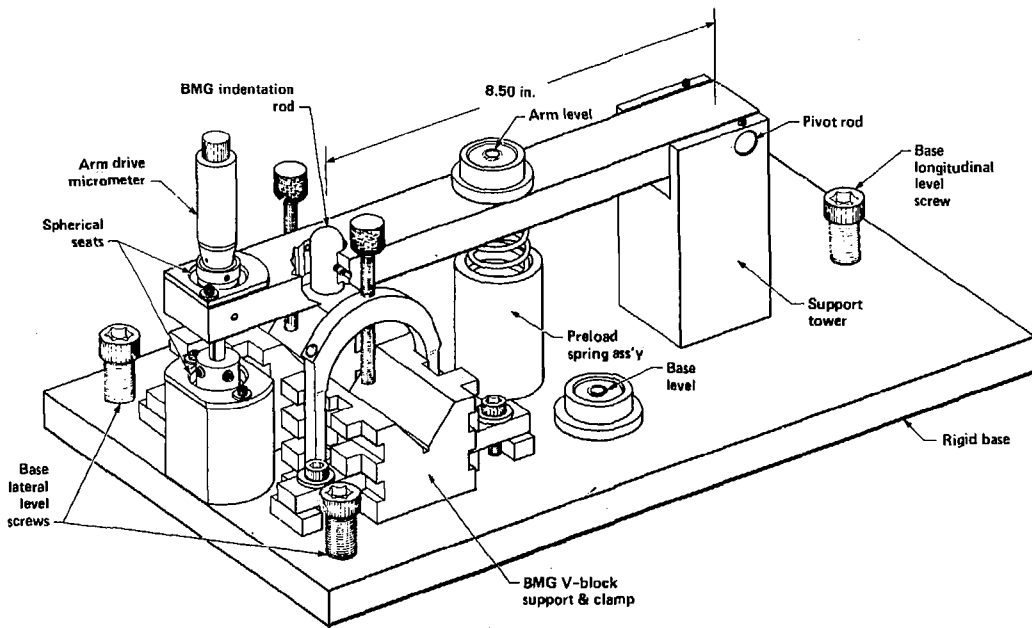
Projection drawing of the micro-indenter device showing the principal parts and dimensions.
